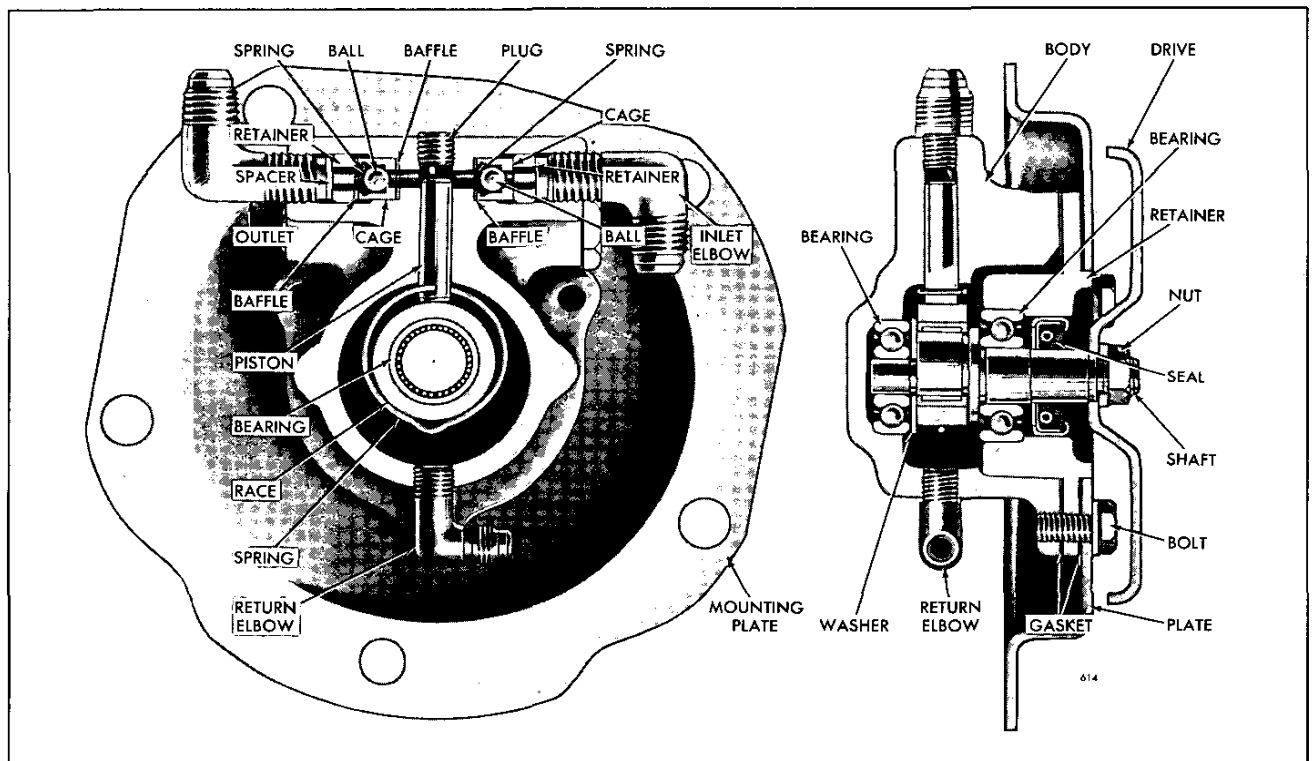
Direct Engine-Driven Hydrostarter Charging Pump
